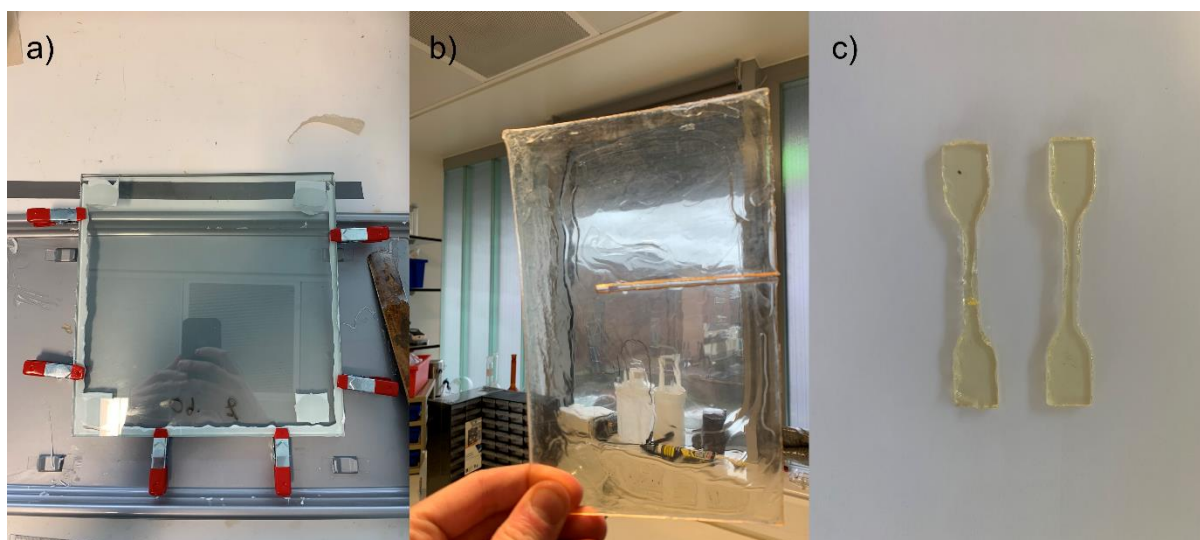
Panel casting setup (a), imperfect panel (b) and damaged tensile samples (c).
